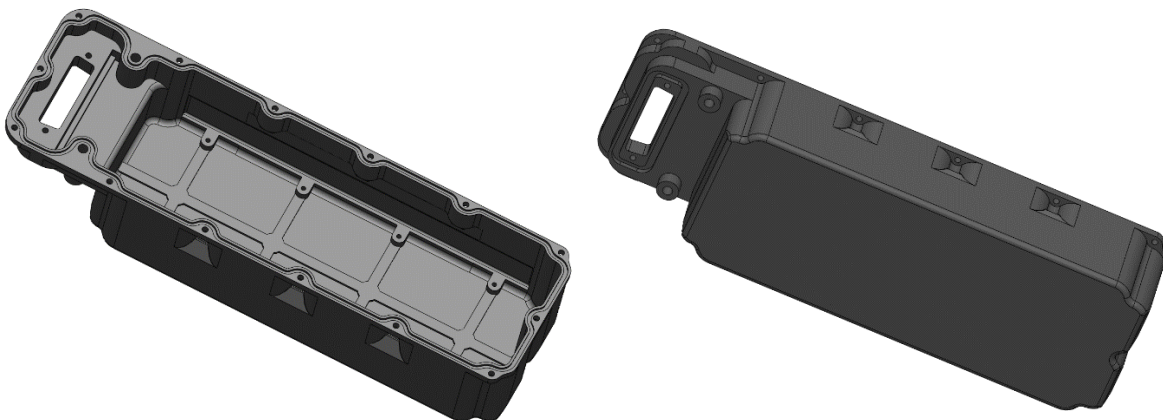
Top and Bottom View of GVR-BOT Payload Tub
